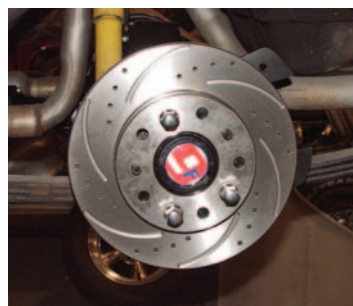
& 7b & 7c: The inner disc brake bracket mounts to the rear end housing using the two upper T-bolts and the one lower rear T-bolt. The inner bracket will support the outer caliper bracket and also serve as the axle bearing retainer. Install the axle into the rear end housing and then the inner disc brake bracket. Install the four nuts onto the T-bolts and torque the nuts to 35 ft/ lbs.
